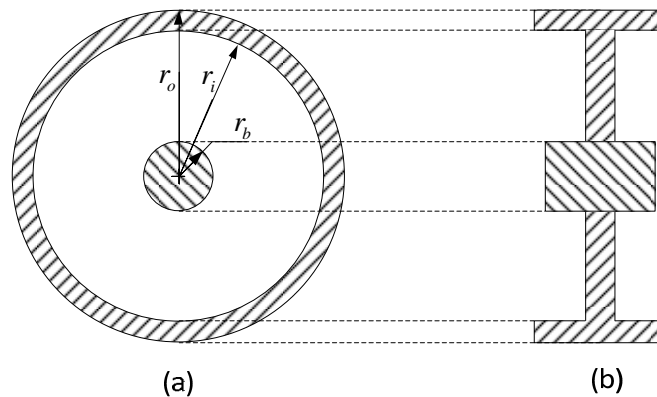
Tie-rod rotor cross section, a) front view, b) side view
